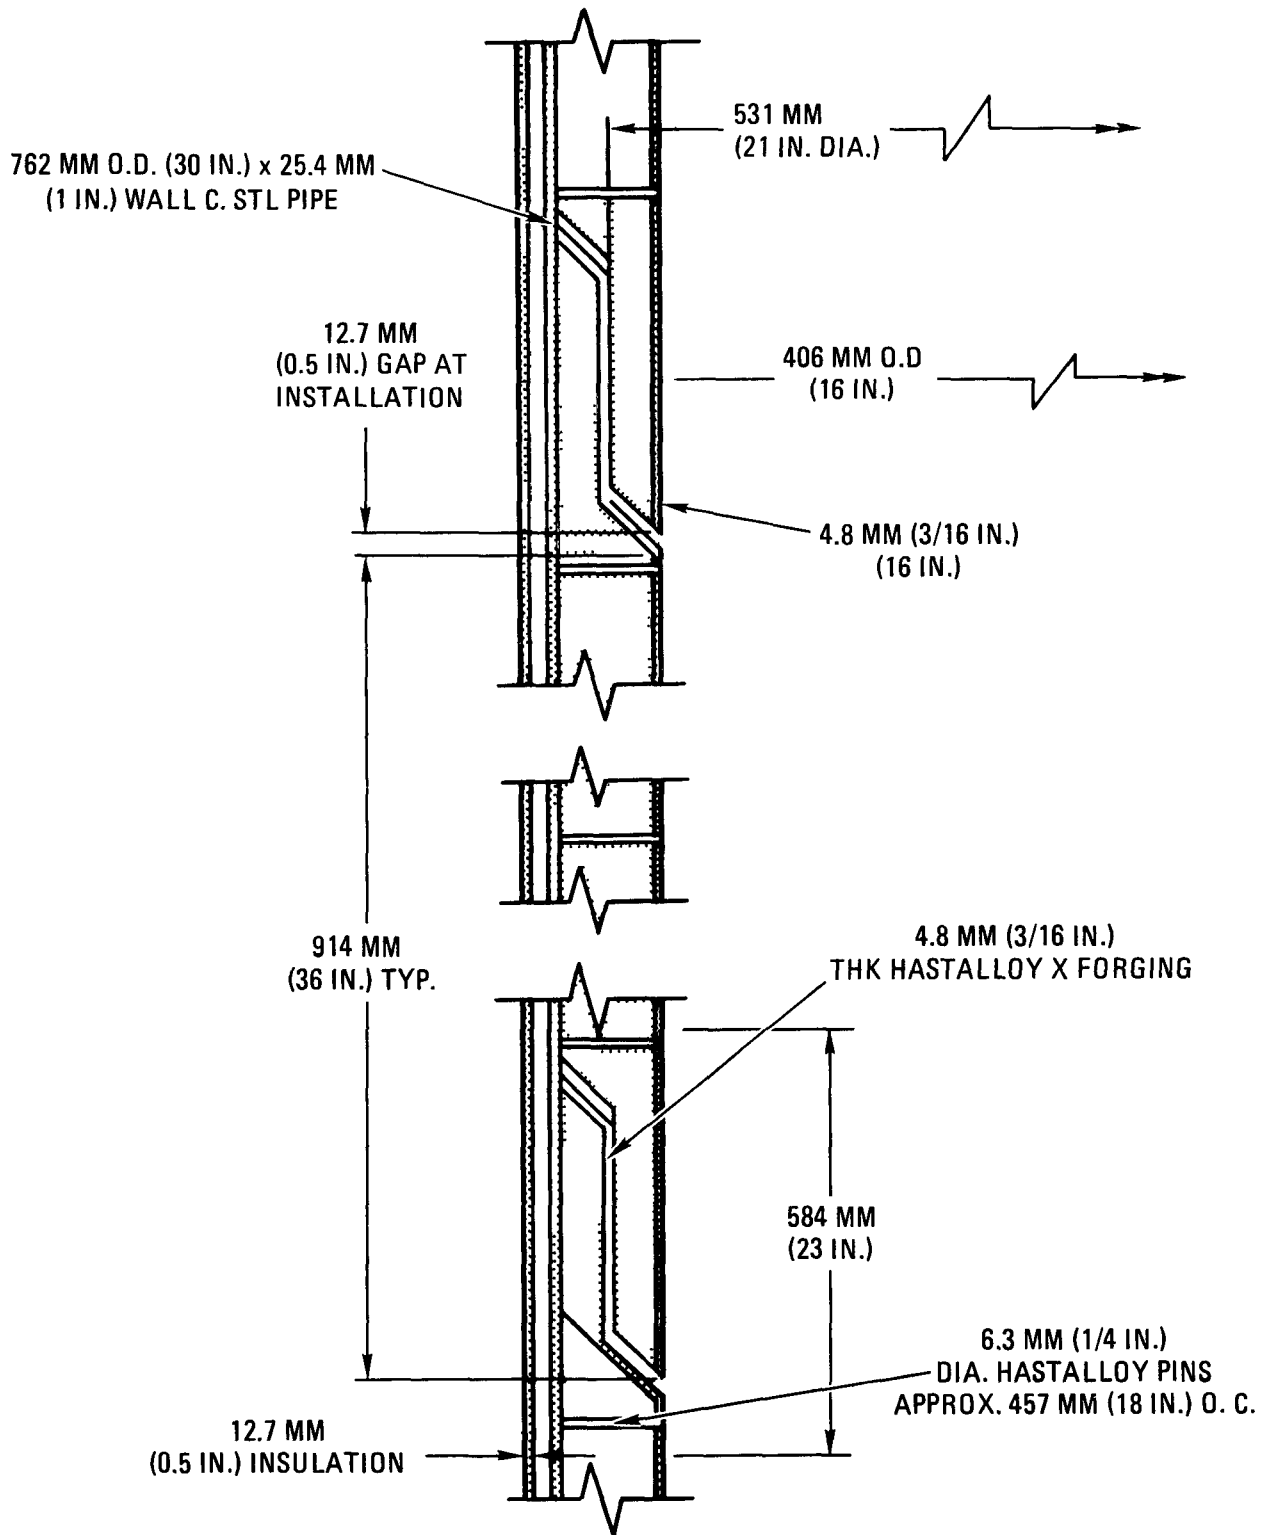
Typical cross section of helium piping, showing internal insulation
